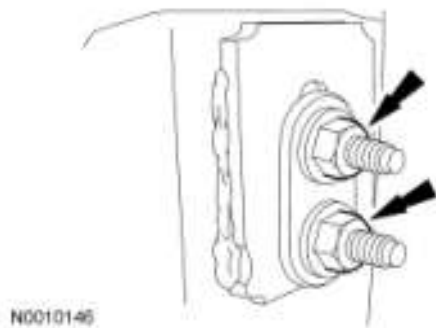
Locating RH Engine Support Insulator Washer And Nuts
